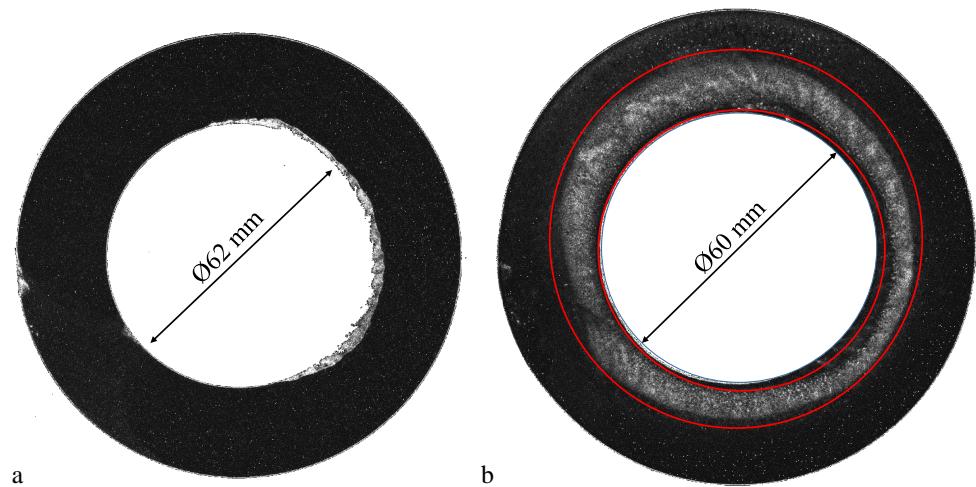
SAM measurements of semi-finished parts: (a) washer after welding and machining, (b) washer after welding and forming.
